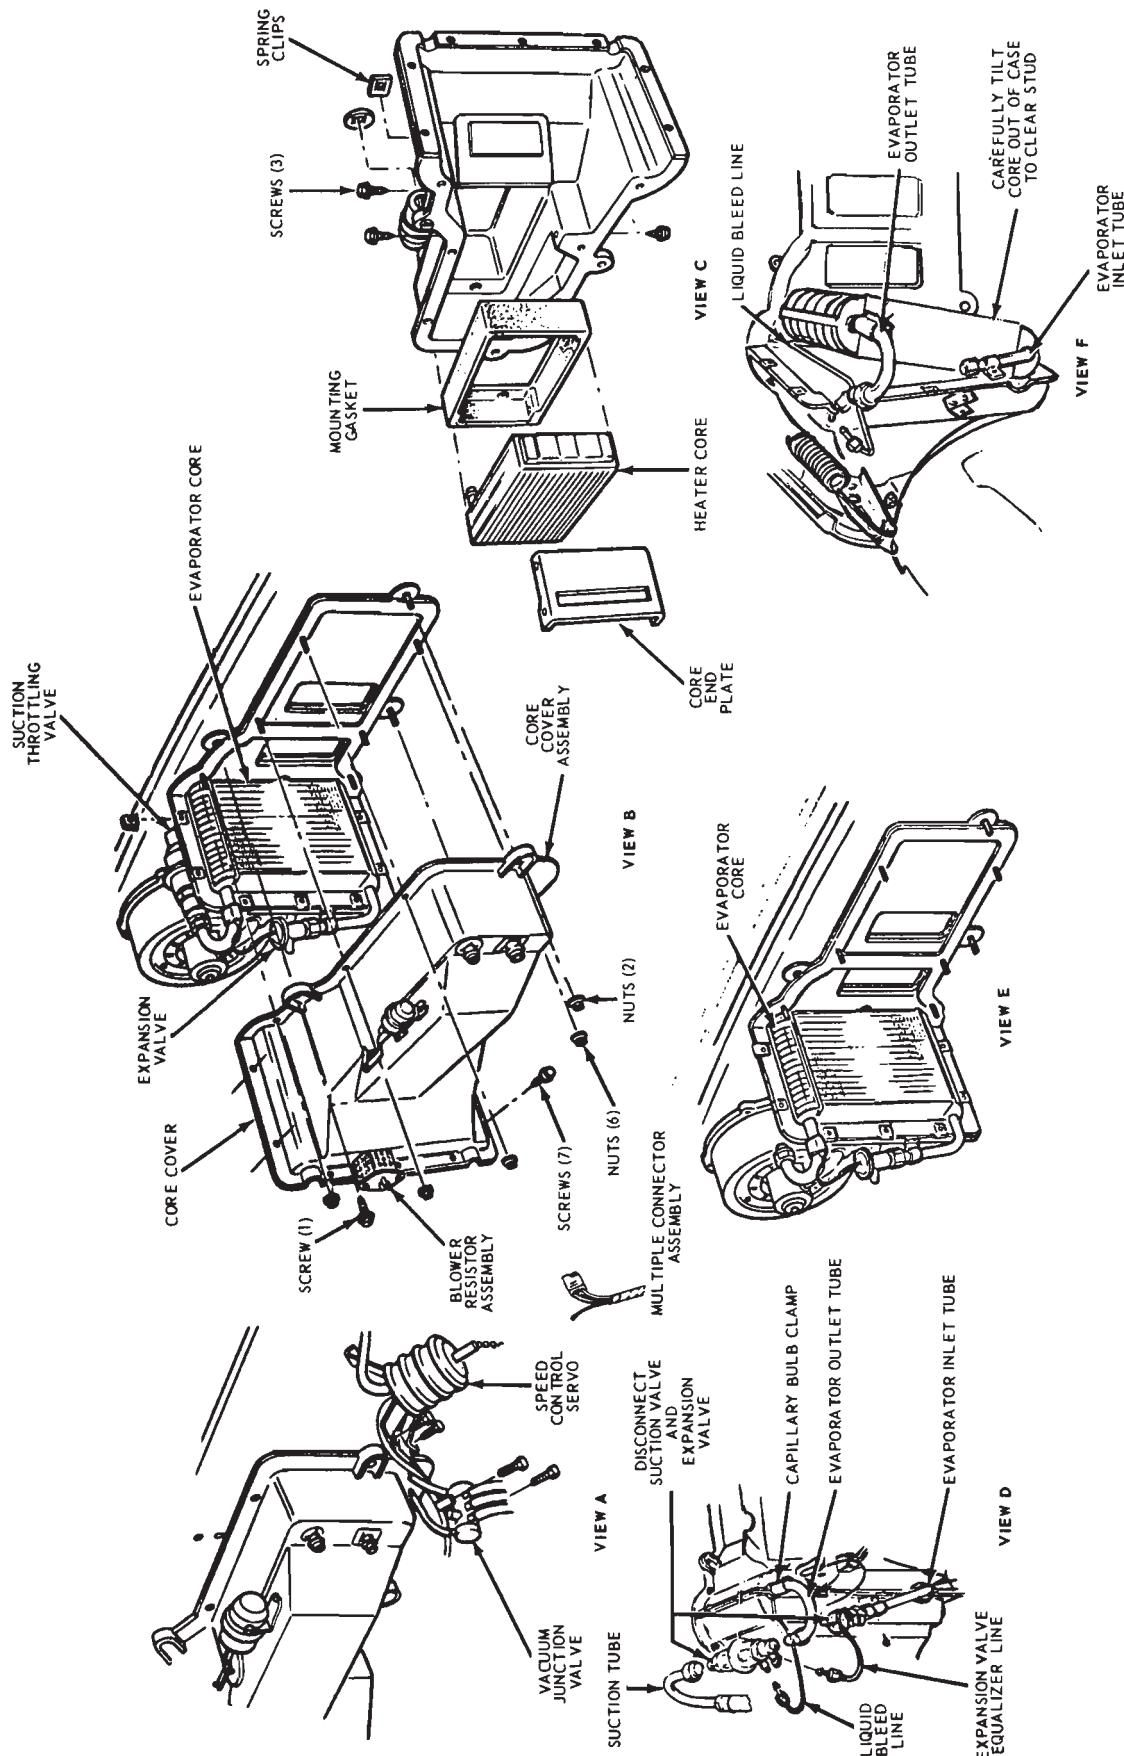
Manual A/C-Heater System Evaporator and Heater Core Removal—Lincoln Continental
